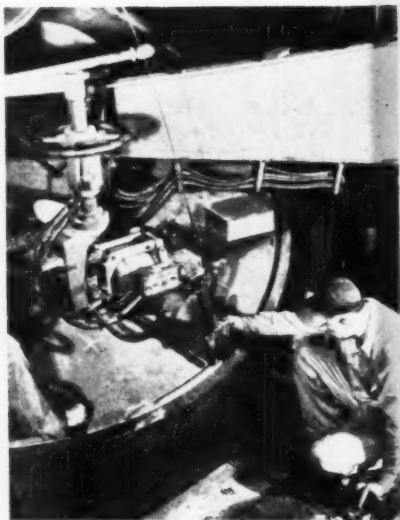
In this close-up of the fabrication of a large "bull gear" for marine propulsion at the Sunnyvale, Cal. plant of the Westinghouse Electric Corp., the rim is being welded to the wheel. The worker at right keeps constant check on adjustment of the welding apparatus. The man at the left is removing excess sand with a suction hose. Hidden by the welding machine wheel are the torches that keep the rim heated during the weld.
